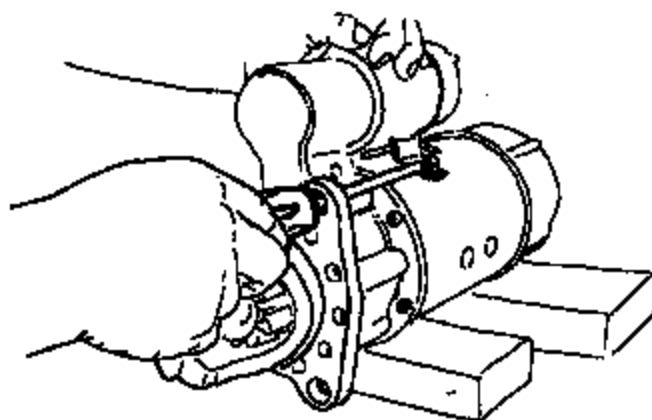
Using a Screwdriver to Align Flange Mounting Hole with Solenoid Housing Mounting Bolt
